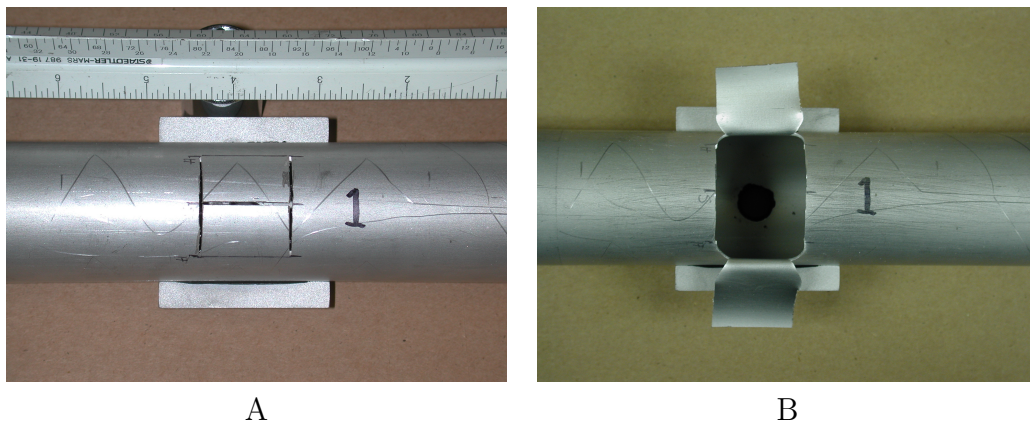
Before and after photographs of flap tube 1. Note that the tube wall tore at the end of the cut, creating radiused corners extending to a new hinge line.
